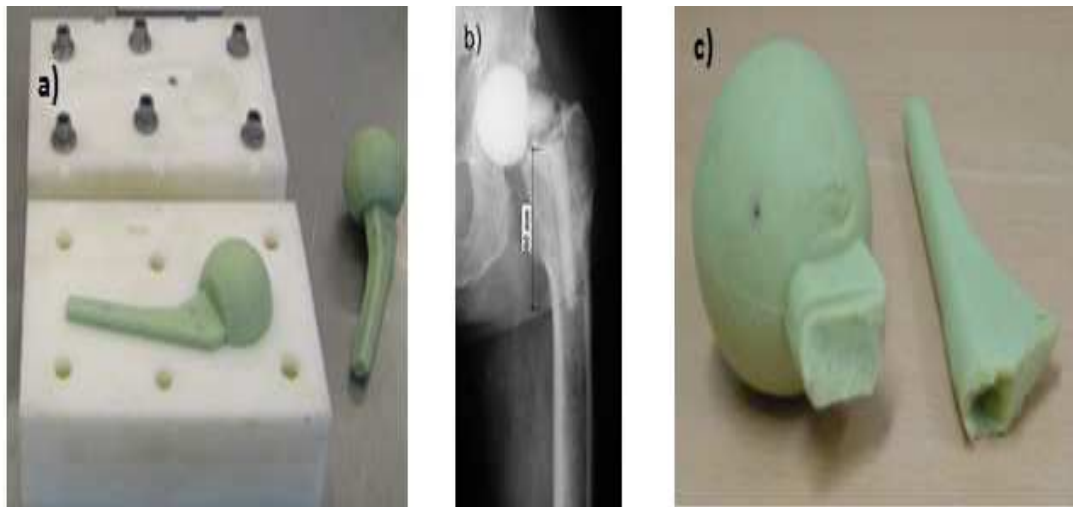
(a) Cement spacer. (b) Radiography of in vivo implanted spacer with stem fracture. Clinical observations at the Saarland University Hospital (Germany) revealed that fracture occurred typically about 60 mm from the tip of the stem [6]. (c) The fractured cement spacer mould as removed from the hip [7].
